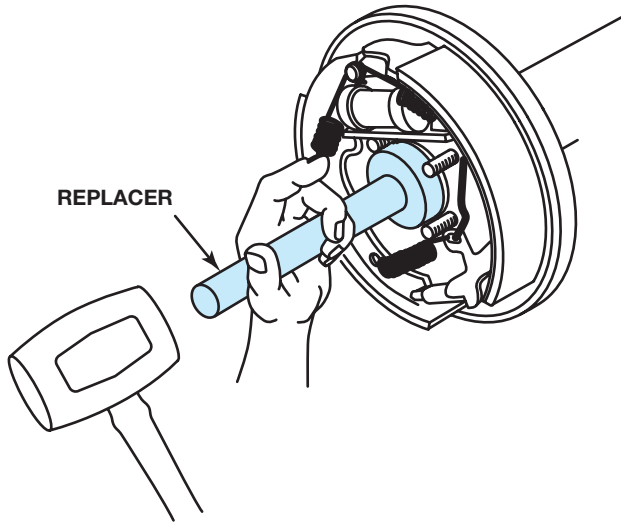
A new axle bearing is installed using a special driver and hammer.
